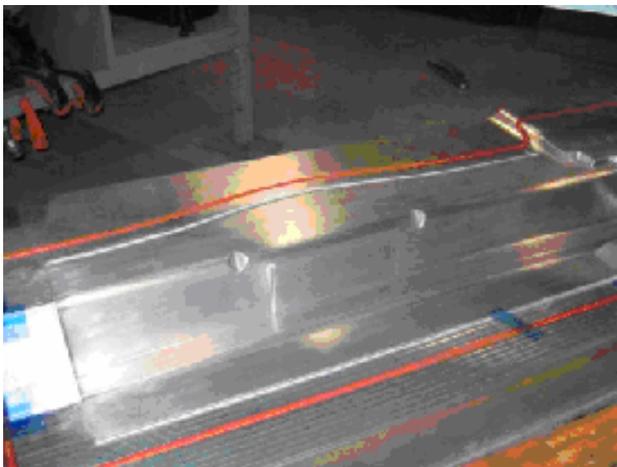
Open view of Aluminum based RTM “Pre-PV” tool for sections 3&4
